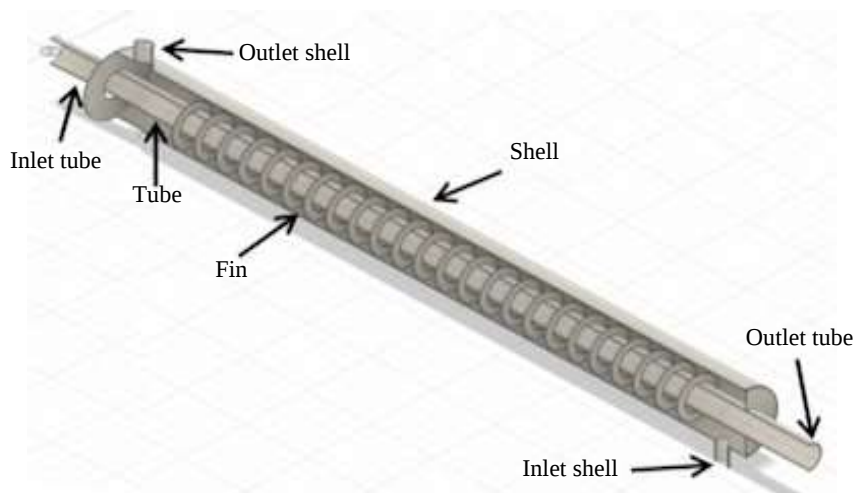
CAD model of the annular finned double pipe heat exchanger.
